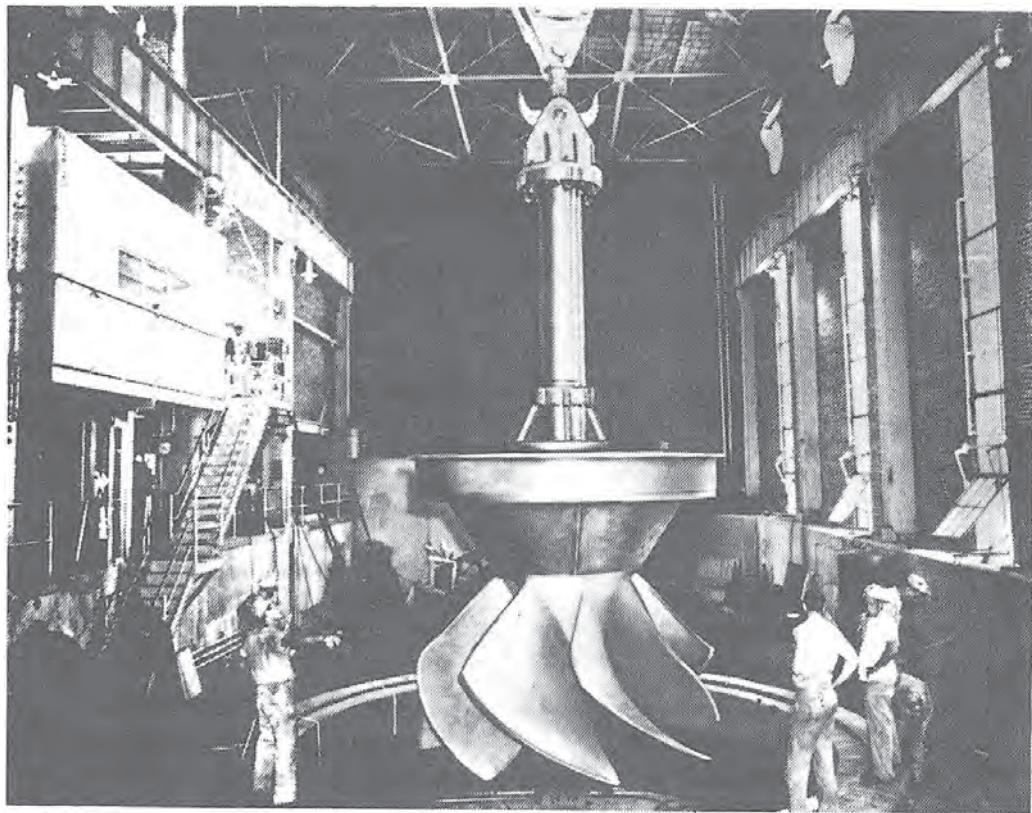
Installation of Head Cover and Runner Assembly for Yadkin Falls Plant
